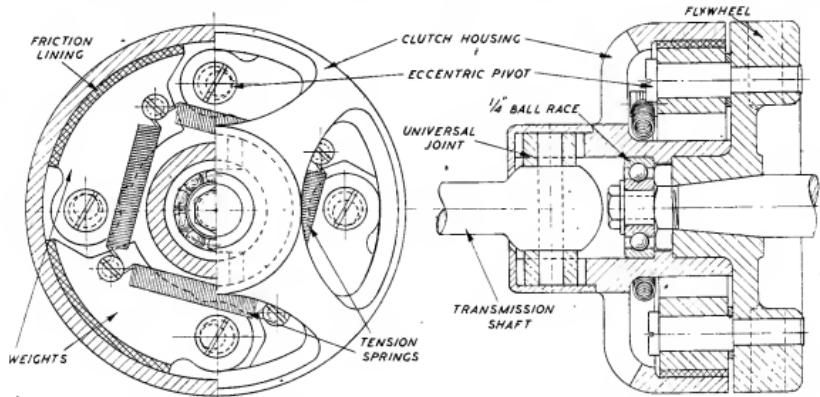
General arrangement of automatic clutch assembled on engine flywheel.
